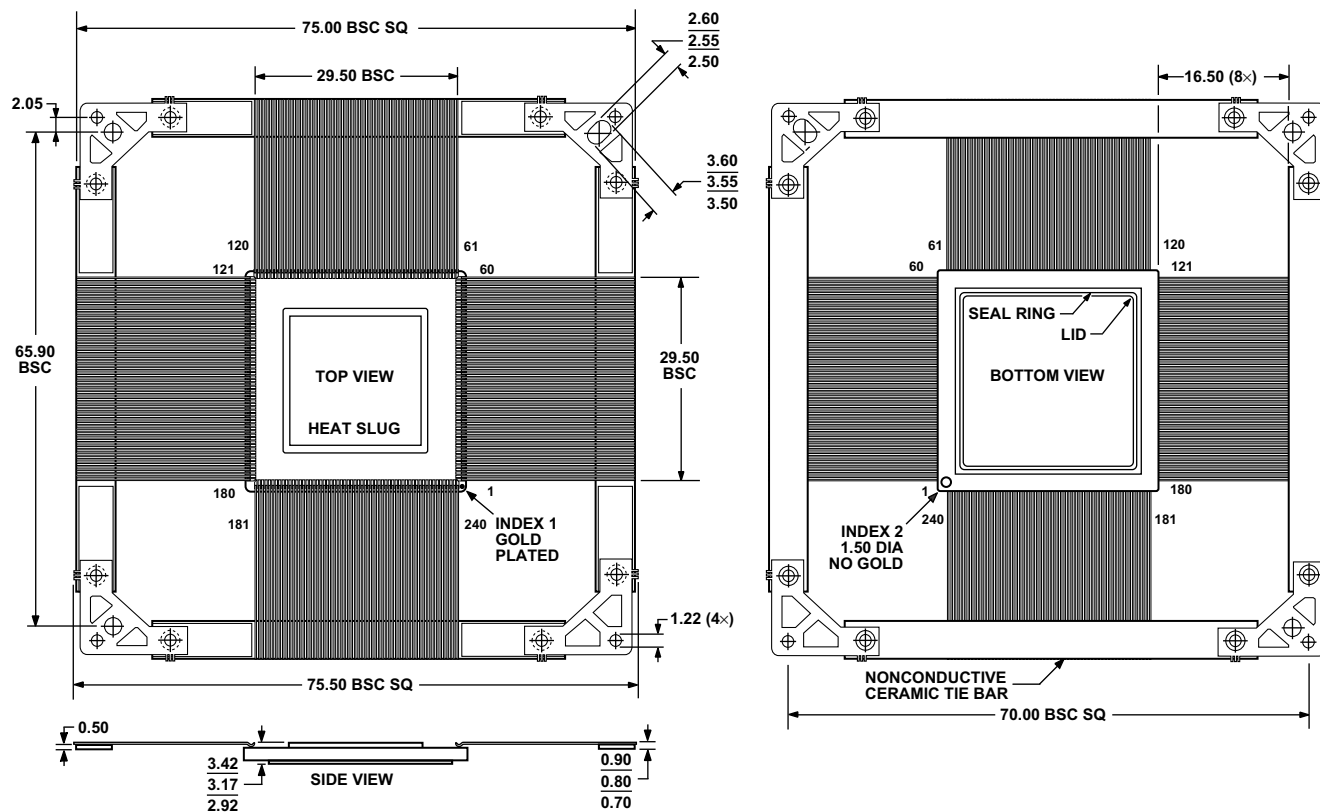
240-Lead Ceramic Quad Flat Package, Mounted with Cavity Down [CQFP]
